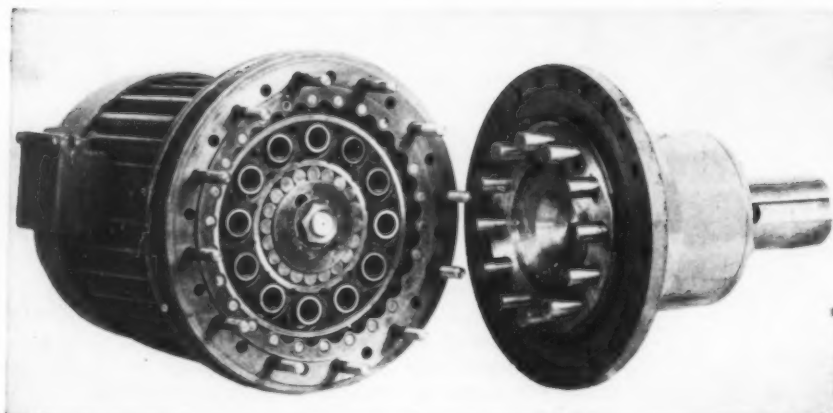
Mechanical components of cycloid reducer with integral motor
